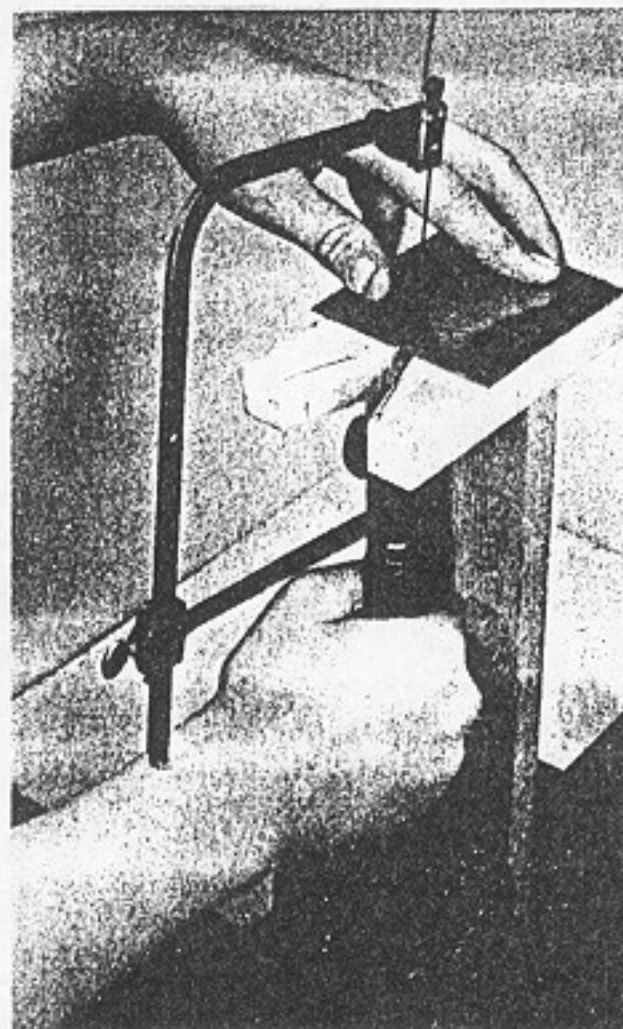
When using a jeweler's saw, be very careful or you will break several of the fine, thin saw blades.
